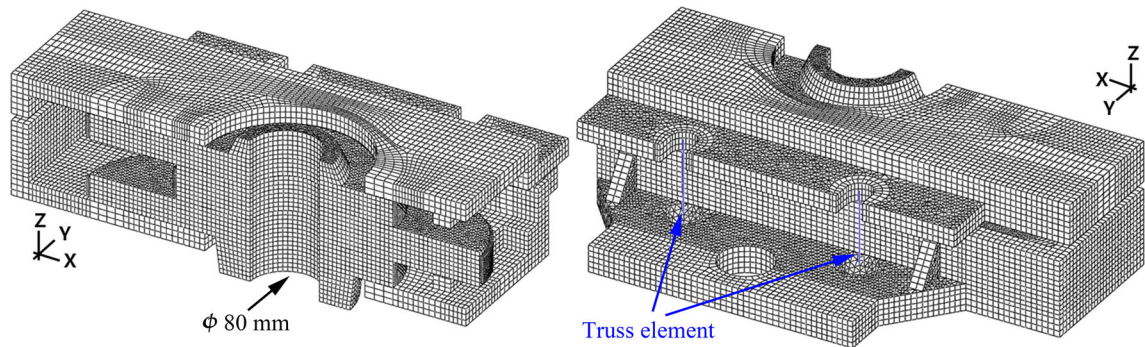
Finite-element mesh of tundish-nozzle slide-gate assembly.
